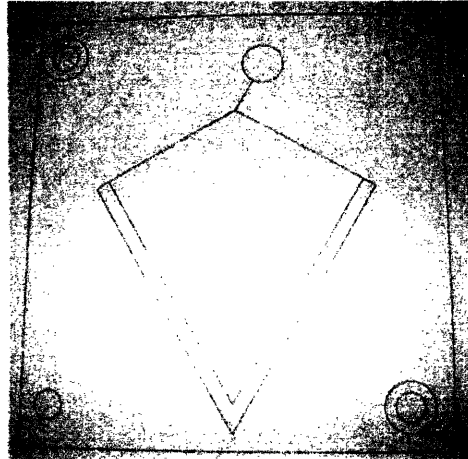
Mastercam drawing of cavity mold corresponding to top half of part
